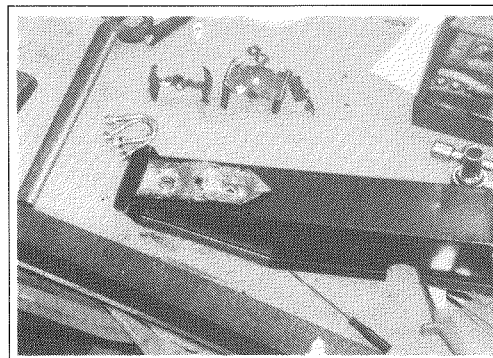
Chassis bolt hole/bracket alignment jig. This was cut from the top of the original box. Mark bolt holes and using a suitable drill clamp the jig down and drill through.
